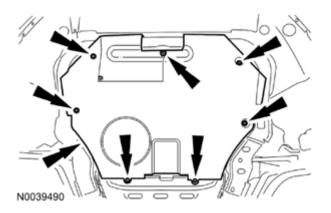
Locating Underbody Cover And Screws Courtesy of FORD MOTOR CO.
